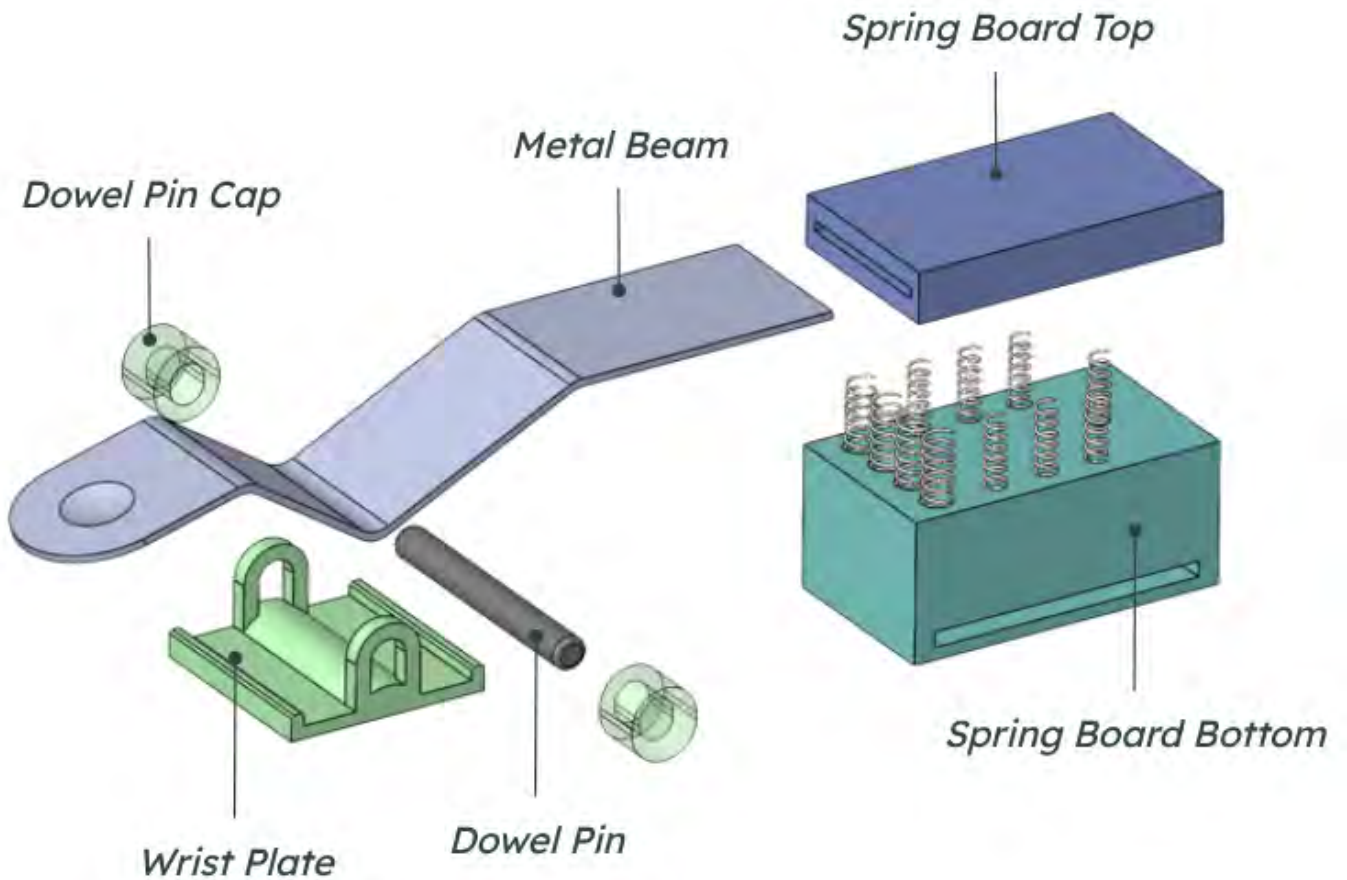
Exploded view of the DexPlay assembly with labeled parts.
